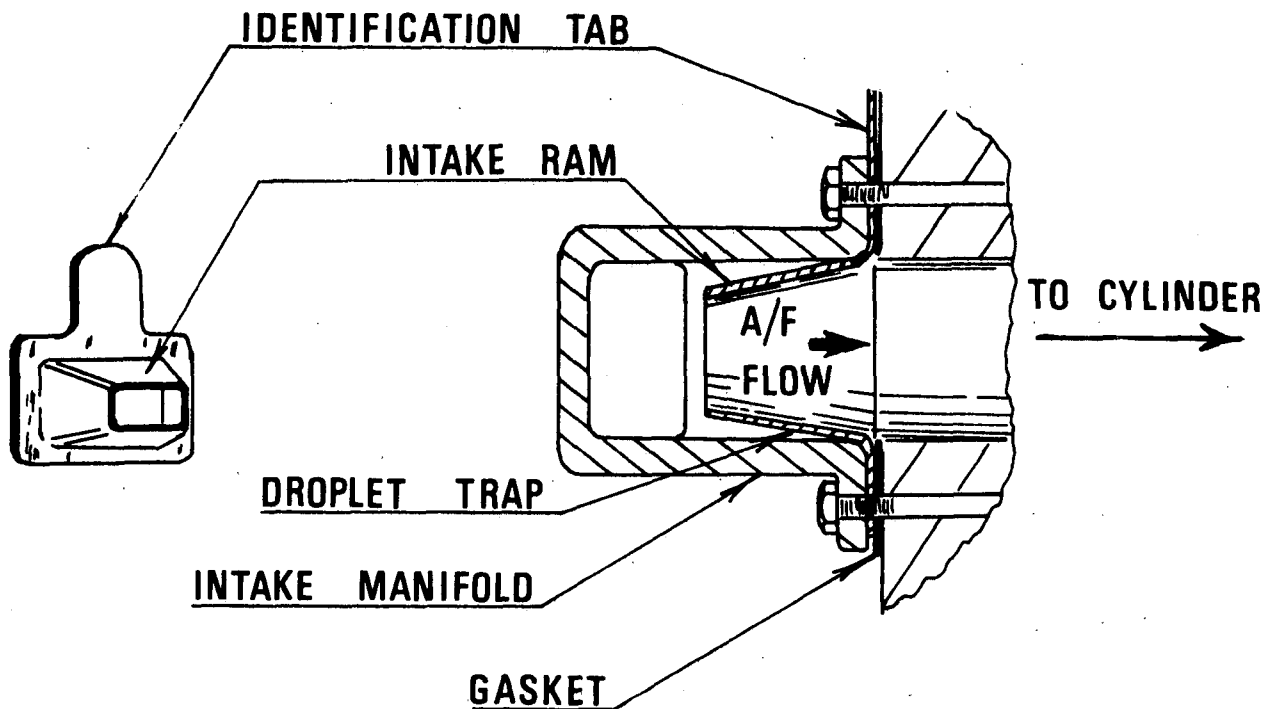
DEVICE 172 INTAKE MANIFOLD MODIFICATION (DEVELOPER SKETCH)
